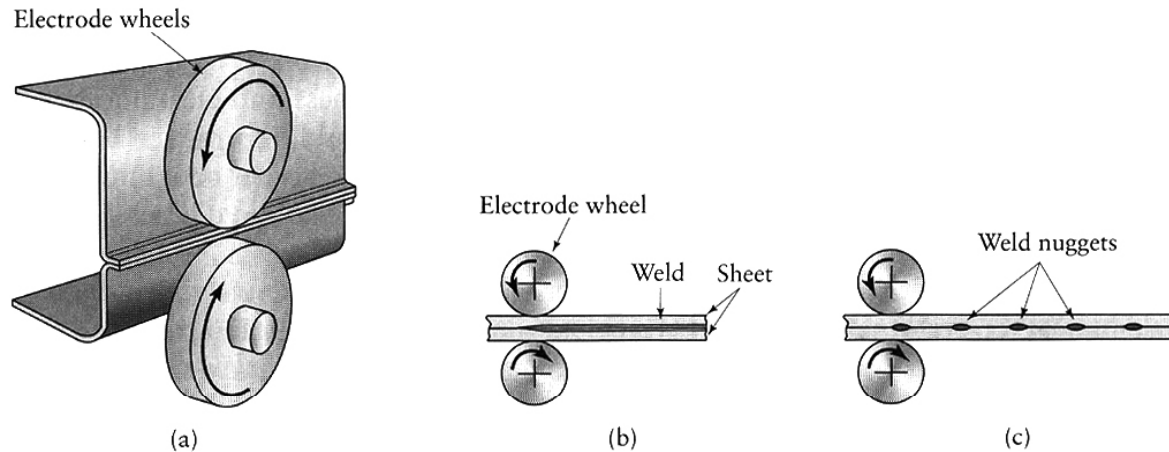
(a) Seam-welding process, with rolls acting as electrodes. (b) Overlapping spots in a seam weld. (c) Roll spot welds.
